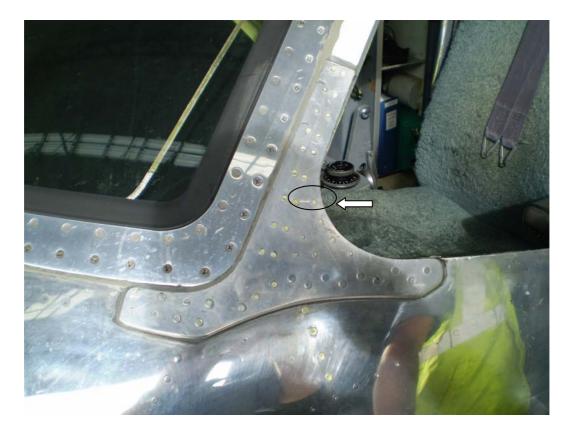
showing external doubler installed. Initial crack has originated from the edge of the doubler to a low edge margin fastener at a location indicated by arrow in the figure. The crack has propagated between the group of three fasteners (circled).
